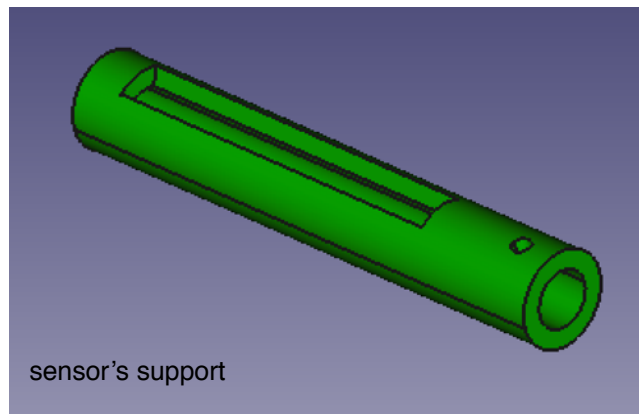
3D model of the sensor's support with a longitudinal cut to introduce the cable and a small hole close to the edge to host the screw.
